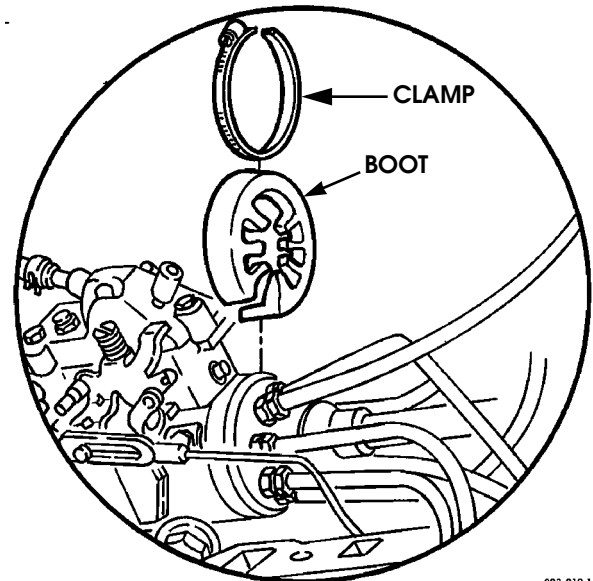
Injection Pump Boot Installation (NA Diesel Shown)
